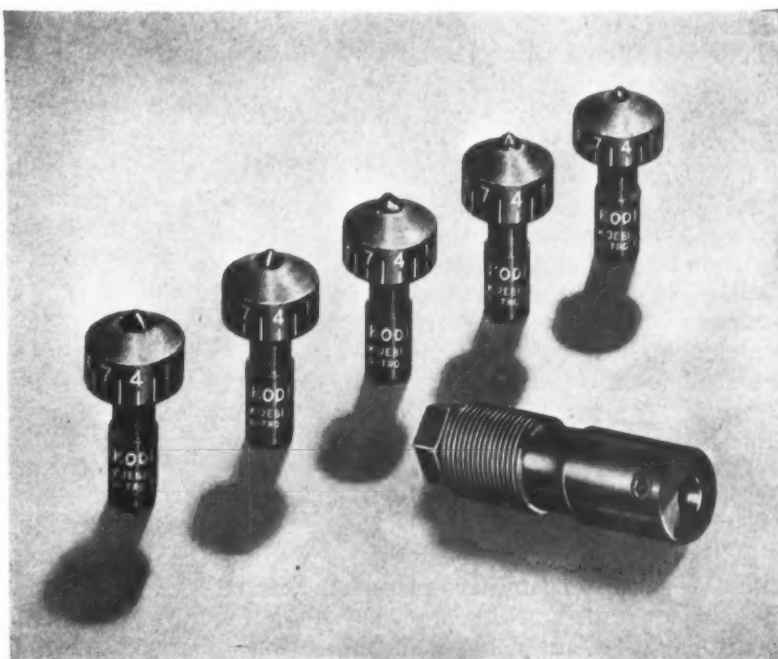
Five Standard Kodi Diamond Nibs and a Nib Adapter Designed for Use on a Single-wheel Hydraulic Gear Grinding Machine
